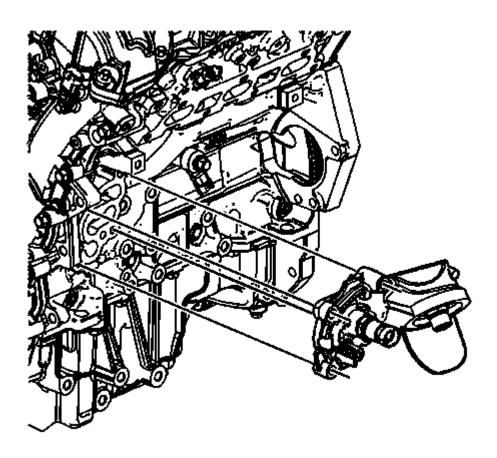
Identifying Oil Filter Adapter Courtesy of GENERAL MOTORS COMPANY
